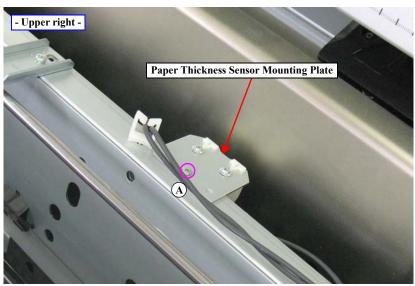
Removing the Paper Thickness Sensor Mounting Plate
